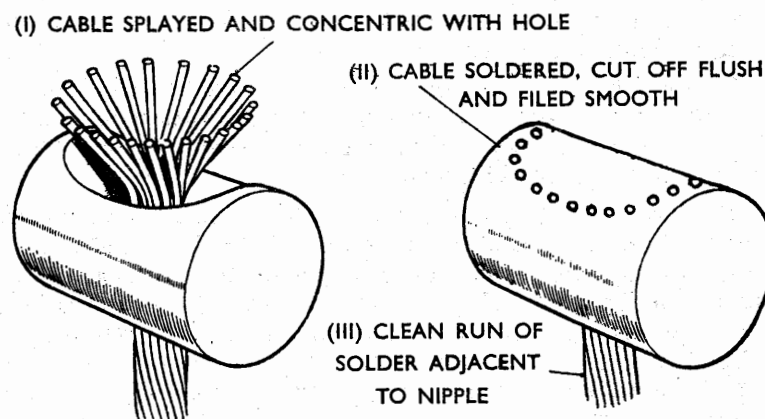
SOLDERING NIPPLES TO STRANDED CABLES
